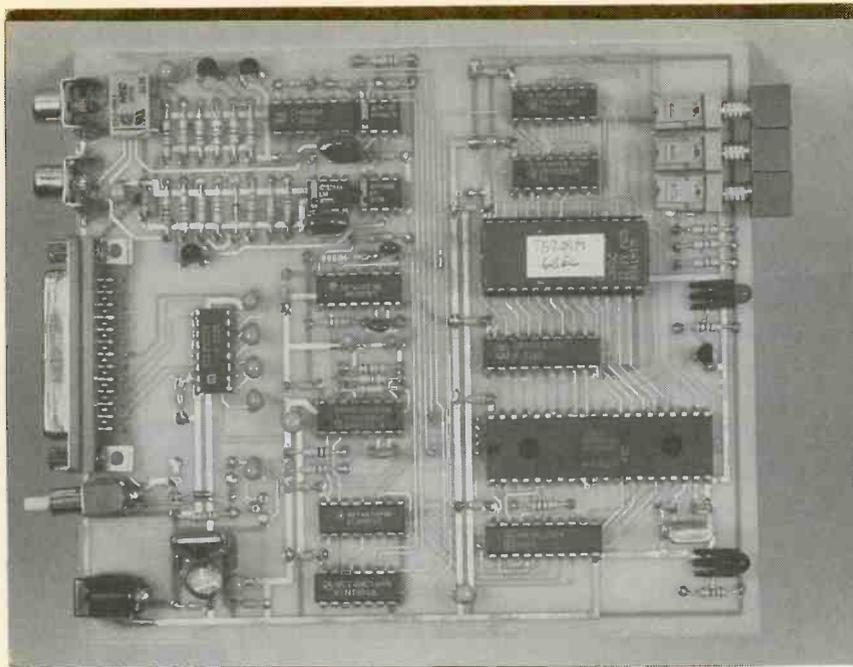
FINISHED PC BOARD. This is an early prototype, so some of the parts might not be the same as those that you will be installing.
